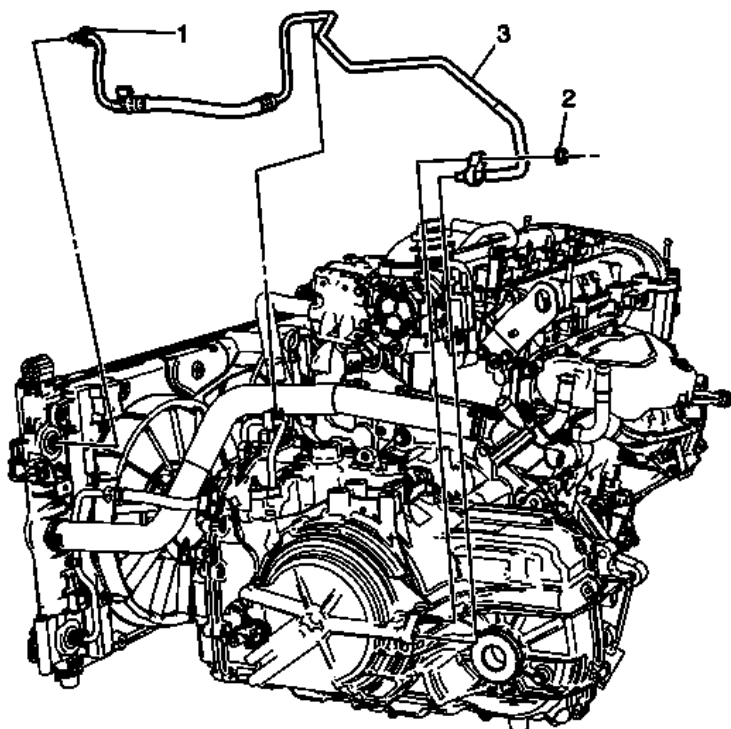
Transmission Fluid Cooler Outlet Pipe & Components (MHH)
